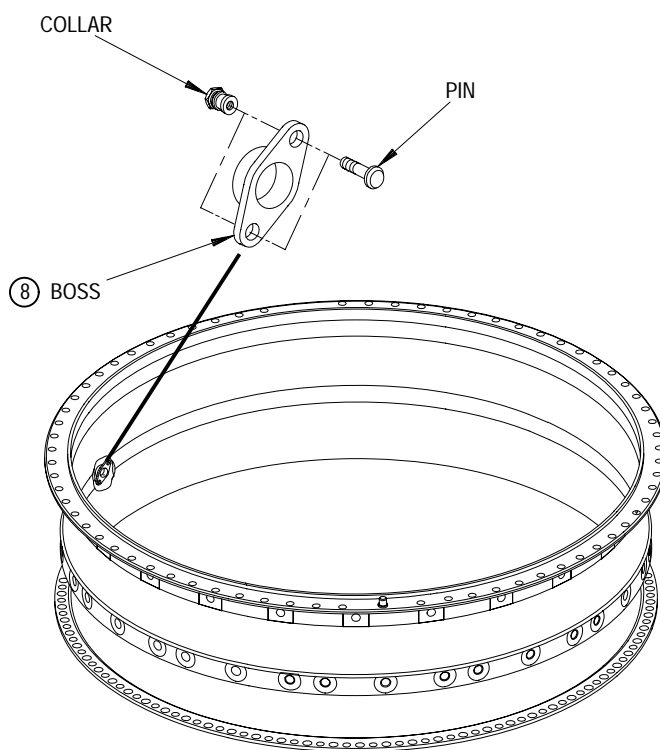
Tenth Through Twelfth Stage Compressor Case Assembly - Inspection (Sheet 1 of 2)
